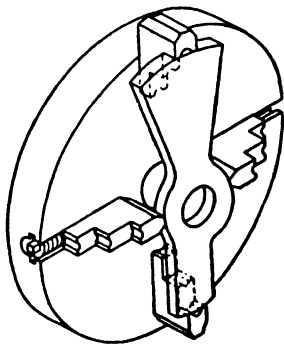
Two jaws reversed to hold ends of a long piece. Other jaws hold the sides.
